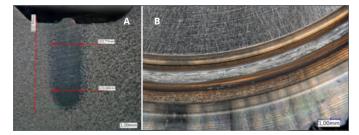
Cross section (A) and surface image (B) of HighLight FL-ARM weld in low carbon steel
